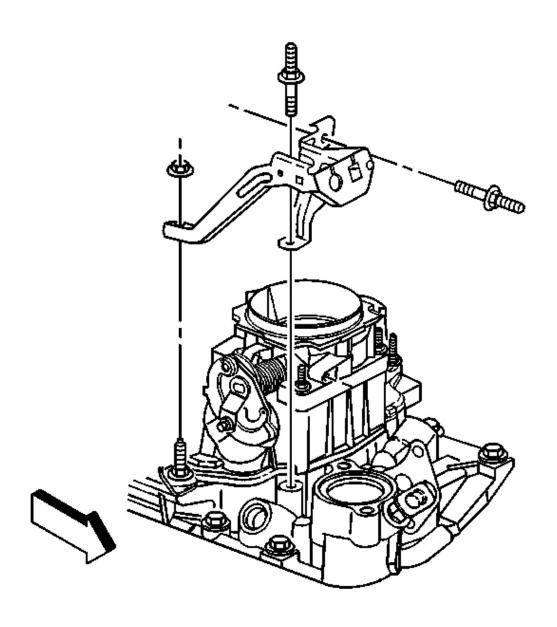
View Of Accelerator Control Cable Bracket Courtesy of GENERAL MOTORS CORP.
